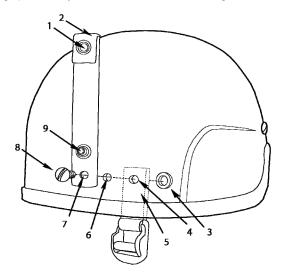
Universal Eyewear Retention Strap and Screw Assembly.
